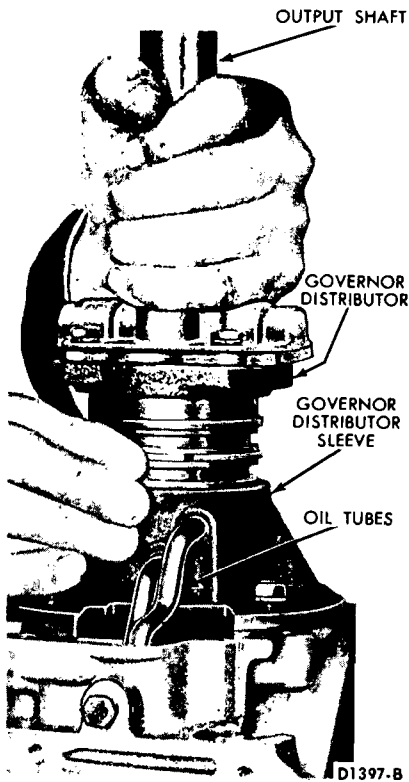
Removing or Installing Output Shaft and Governor Distributor
